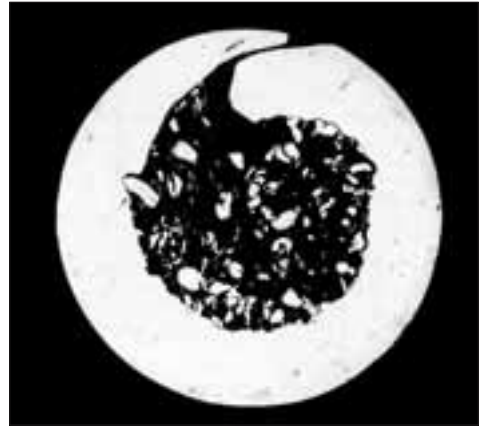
Cross-section of an Avesta Welding flux cored wire
